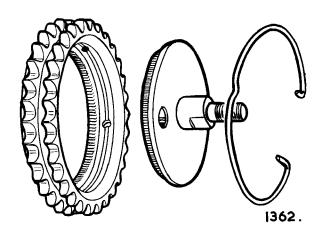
Exploded view of the camshaft sprocket assembly
